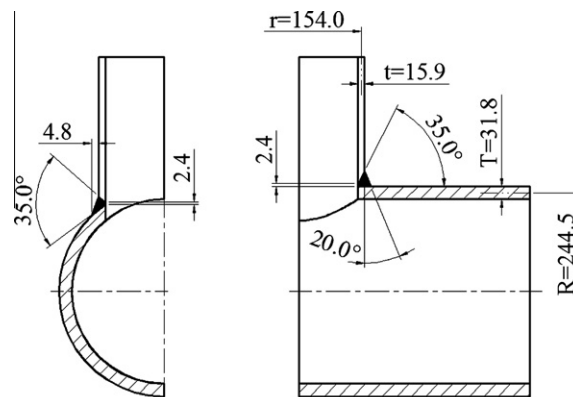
Schematic diagram of a large bore branch with weld details (dimensions in mm).
